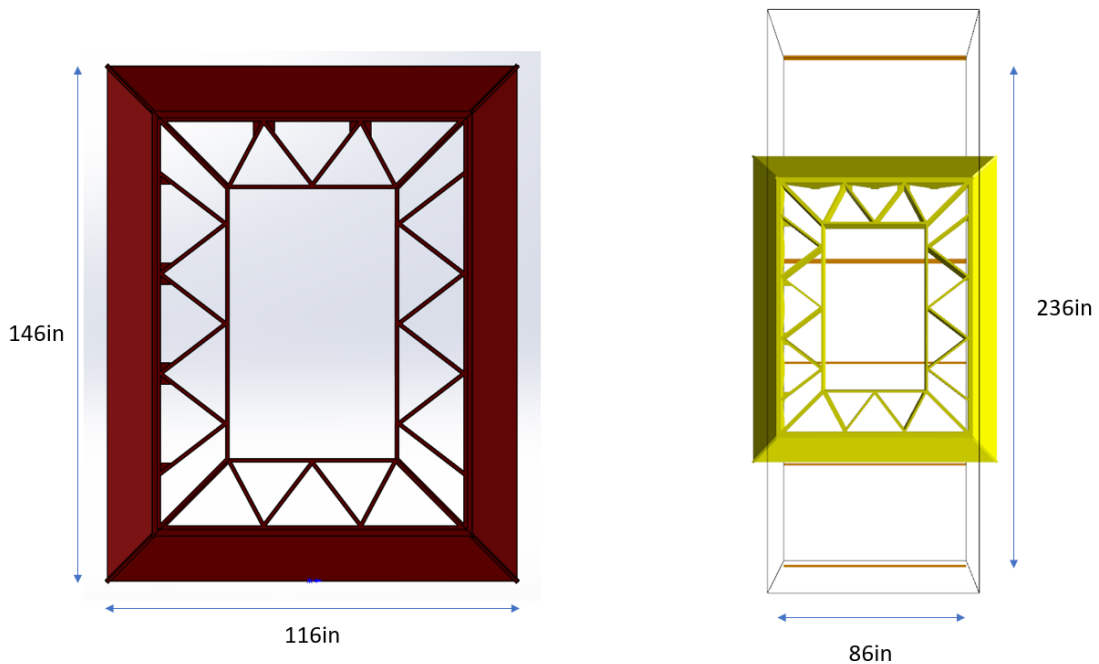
At left, overhead view and dimensions of the largest mold. At right, overhead view of the printer dimensions with the largest molded loaded
